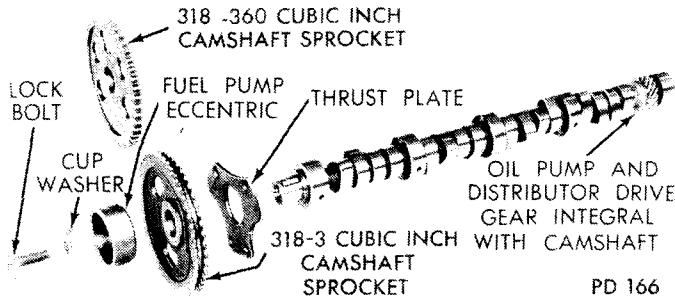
Camshaft and Sprocket Assembly (Disassembled View)
